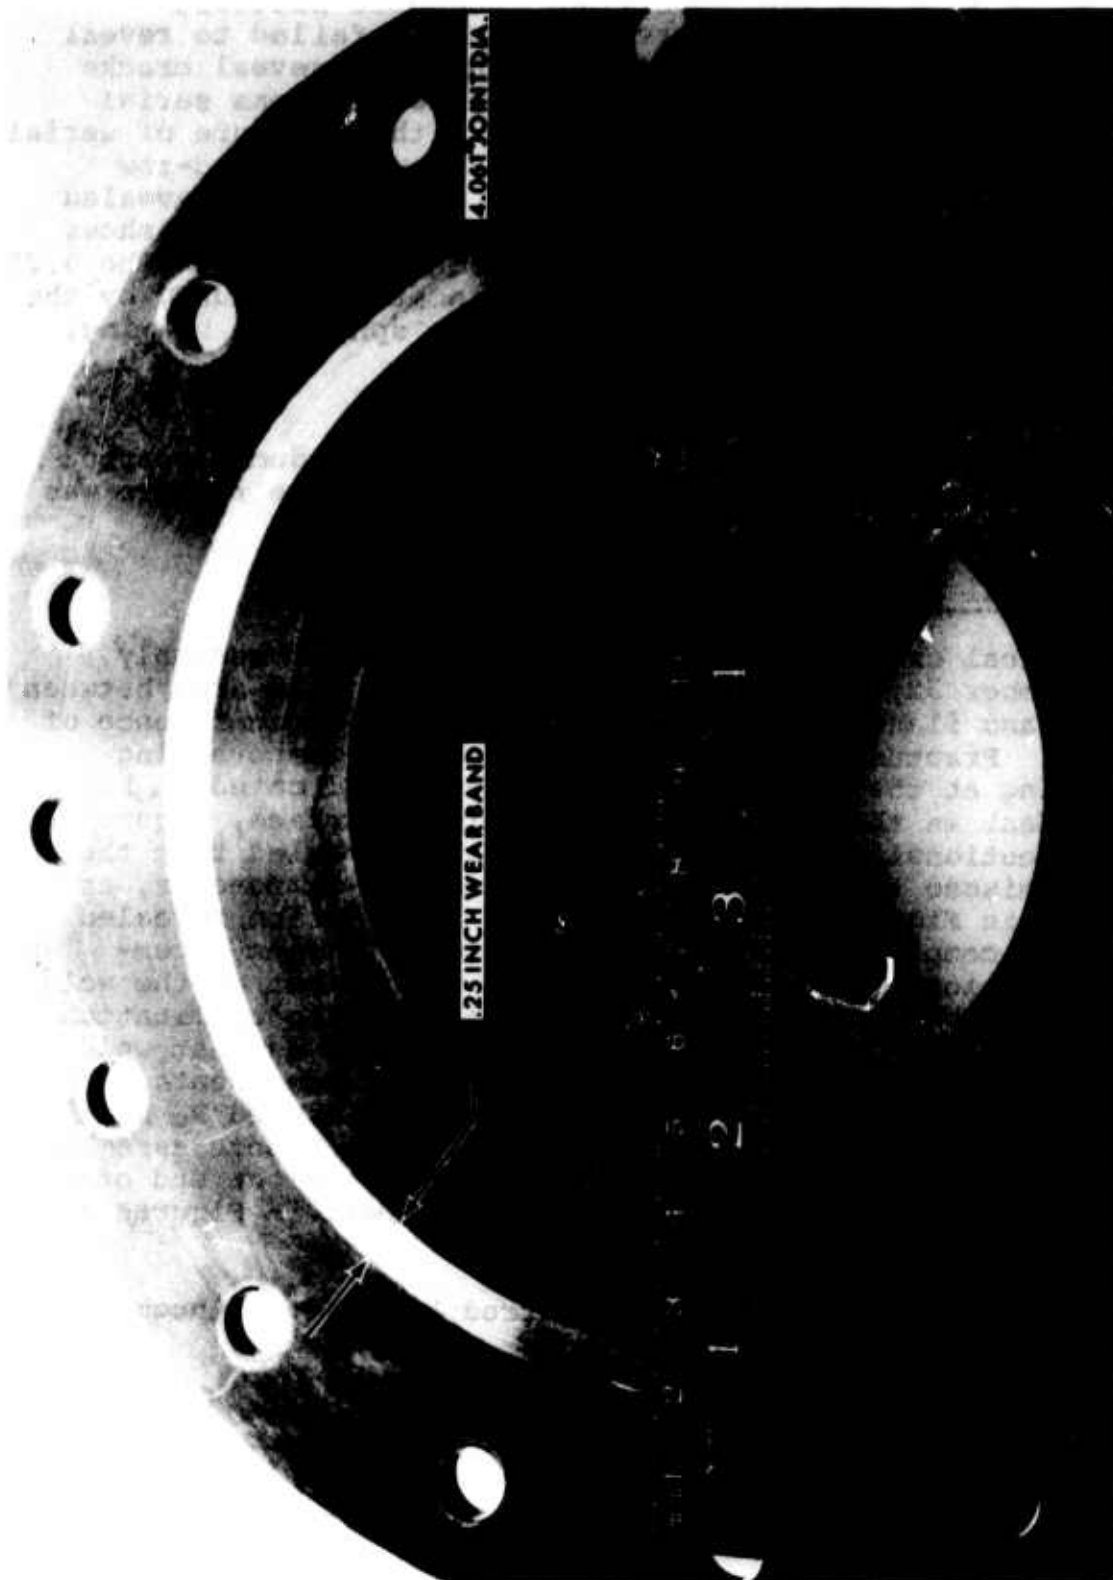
Gear/Flange Assembly - Second-Row Pinion.
